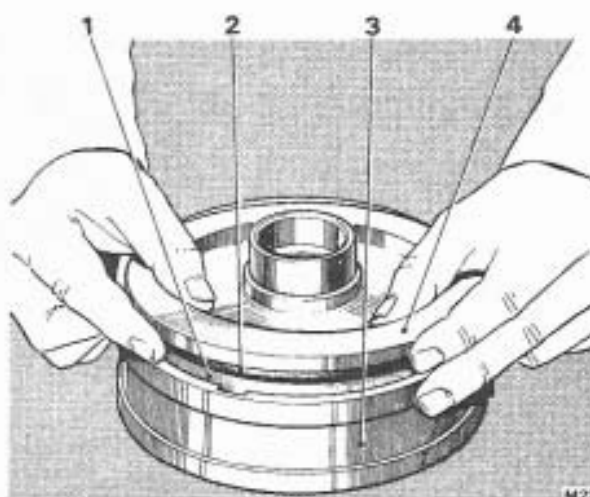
FITTING THE OIL SEAL TO THE CENTRE CLUTCH DRUM ASSEMBLY
